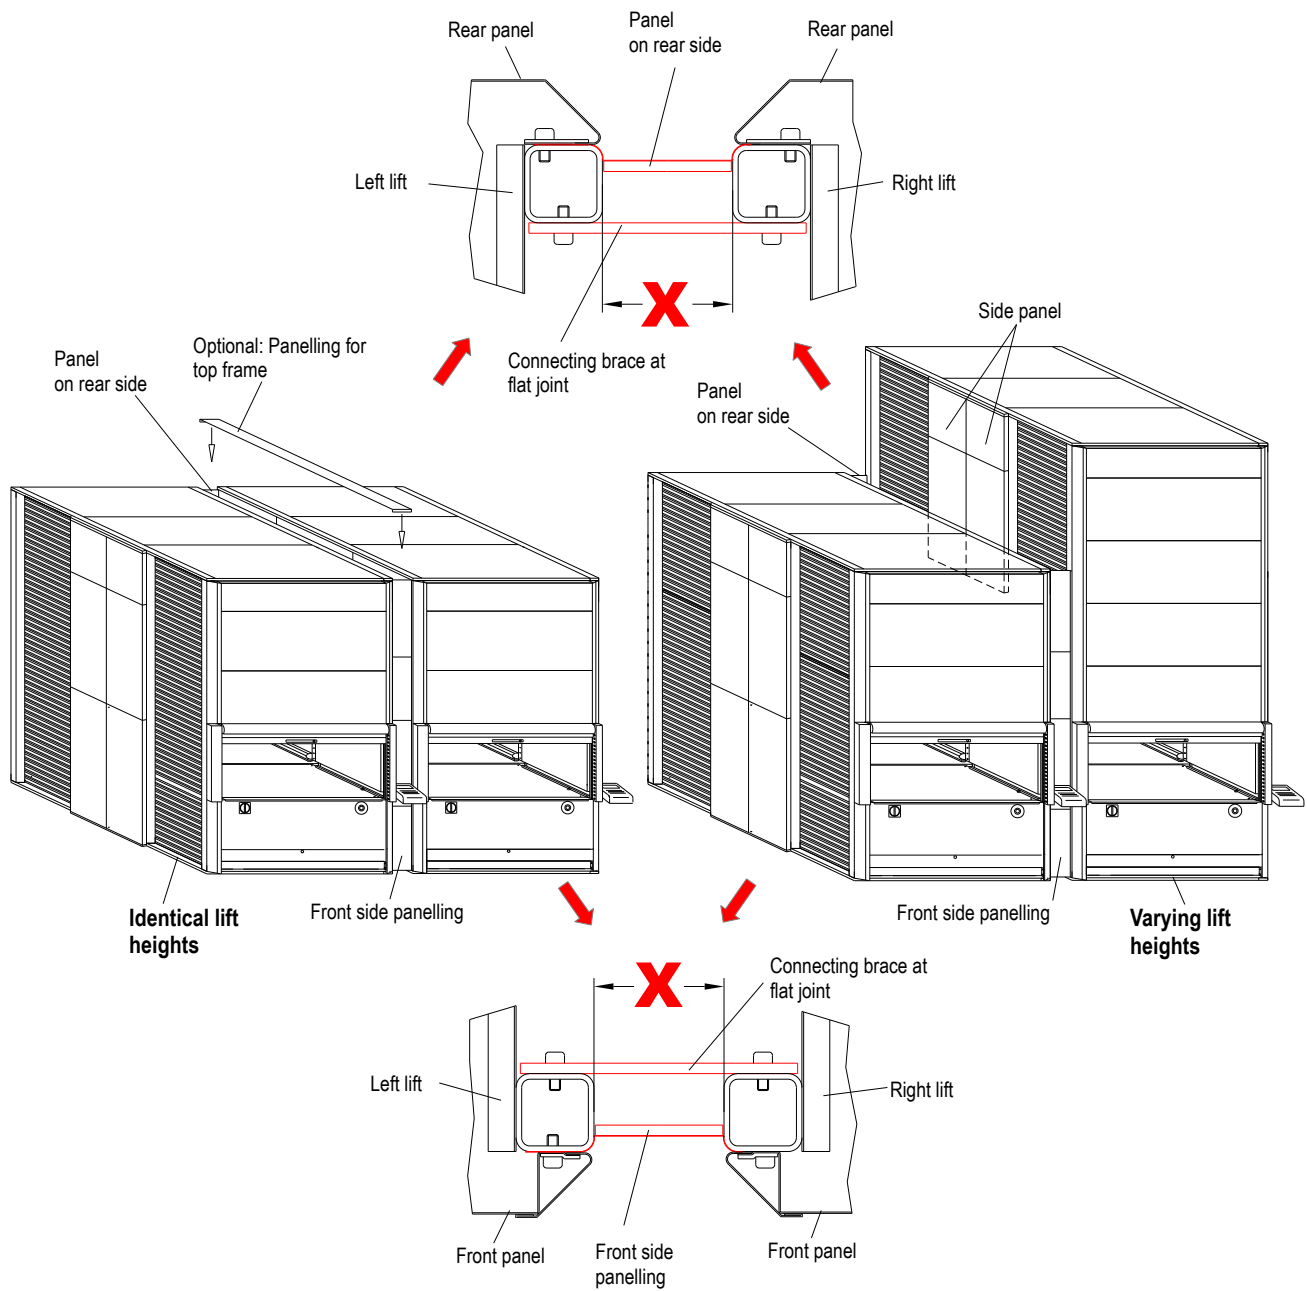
Mounting the panelling, cross-section: Rectangular tubes/side parts of immediately adjacent lifts
